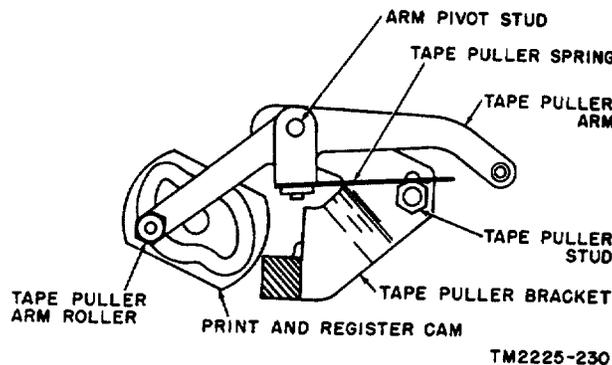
Tape puller mechanism (TT-76A/GGC and subsequent models).
